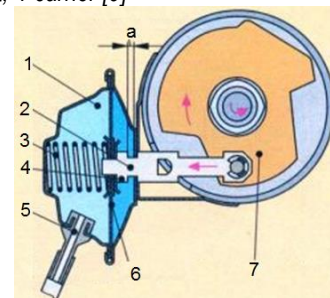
Construction of a vacuum ignition timing regulator: 1- vacuum box, 2-wire, 3-compression spring, 4-bumpers, 5-connection to the inlet pipe below the throttle, 6- membrane, 7- movable plate interrupter, a- adjustment path [9]
